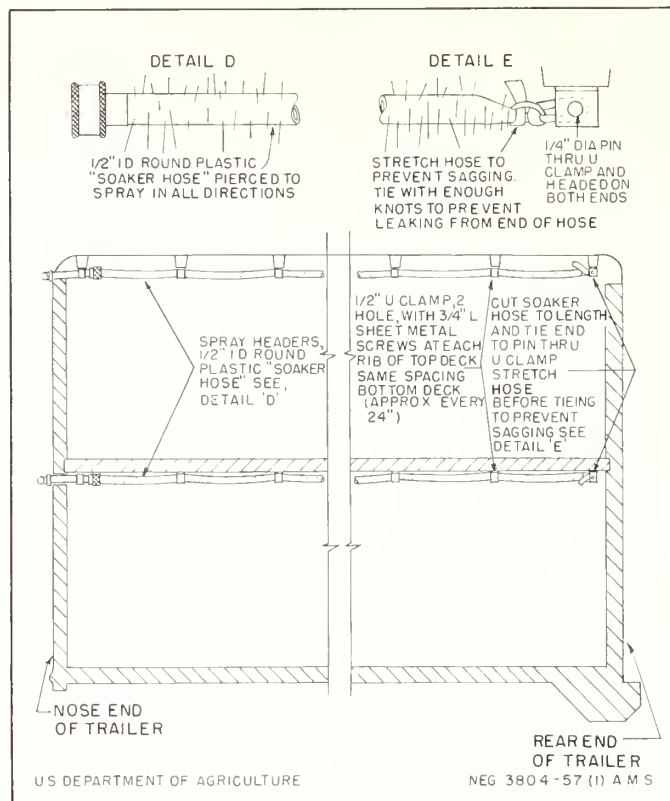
Section B-B of figure 17 showing inside arrangement of soaker-hose sprinkler system.
